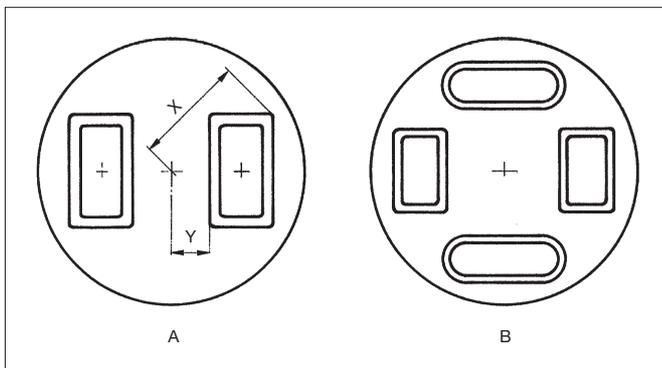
Simultaneous Welding of Multiple parts
